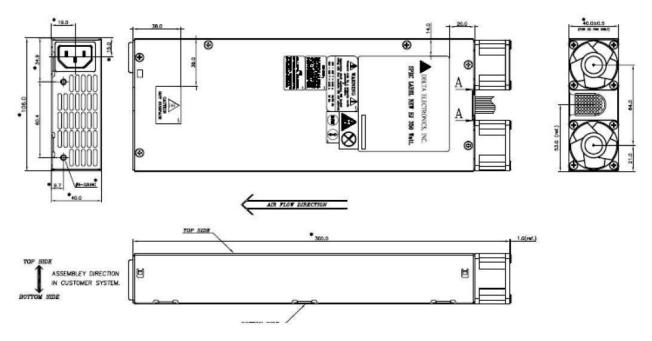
350W AC Power Supply Unit Enclosure Drawing
